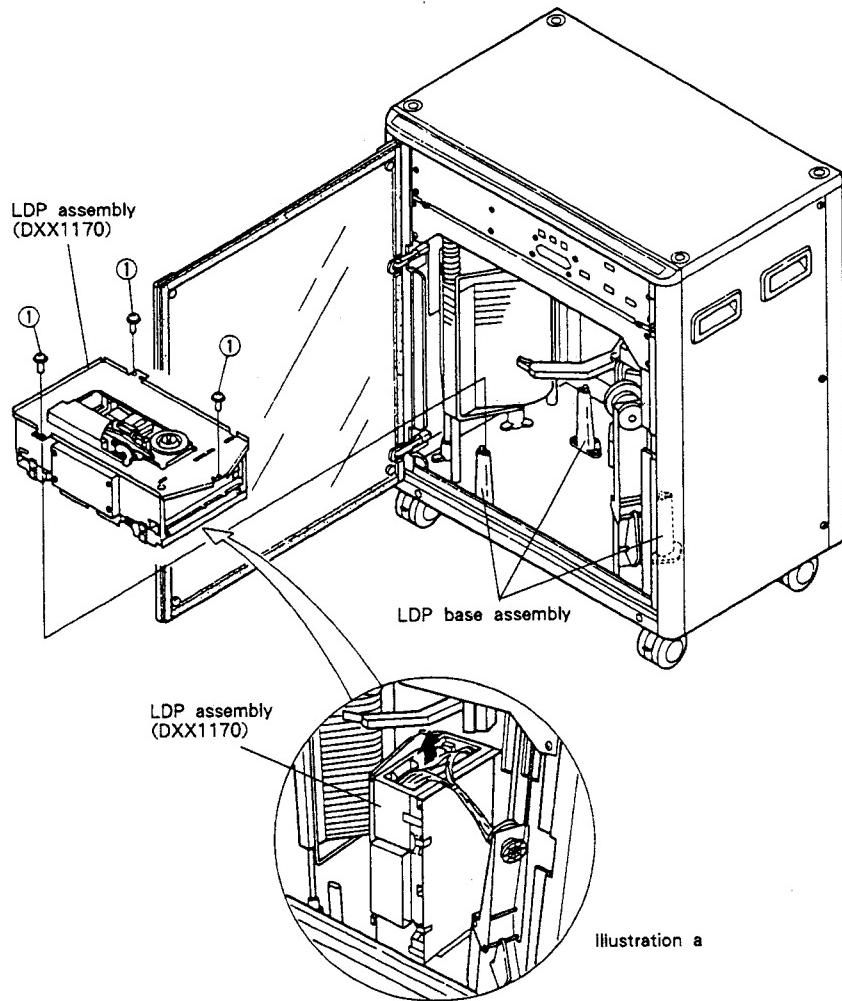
Replacement of the LDP assembly (DXX1170)
